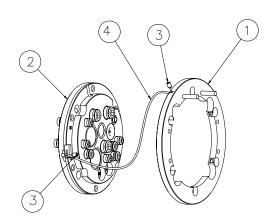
Rear Plate/Break-Away Assembly (Single Paint With Regulator Manifold Assembly Only)
